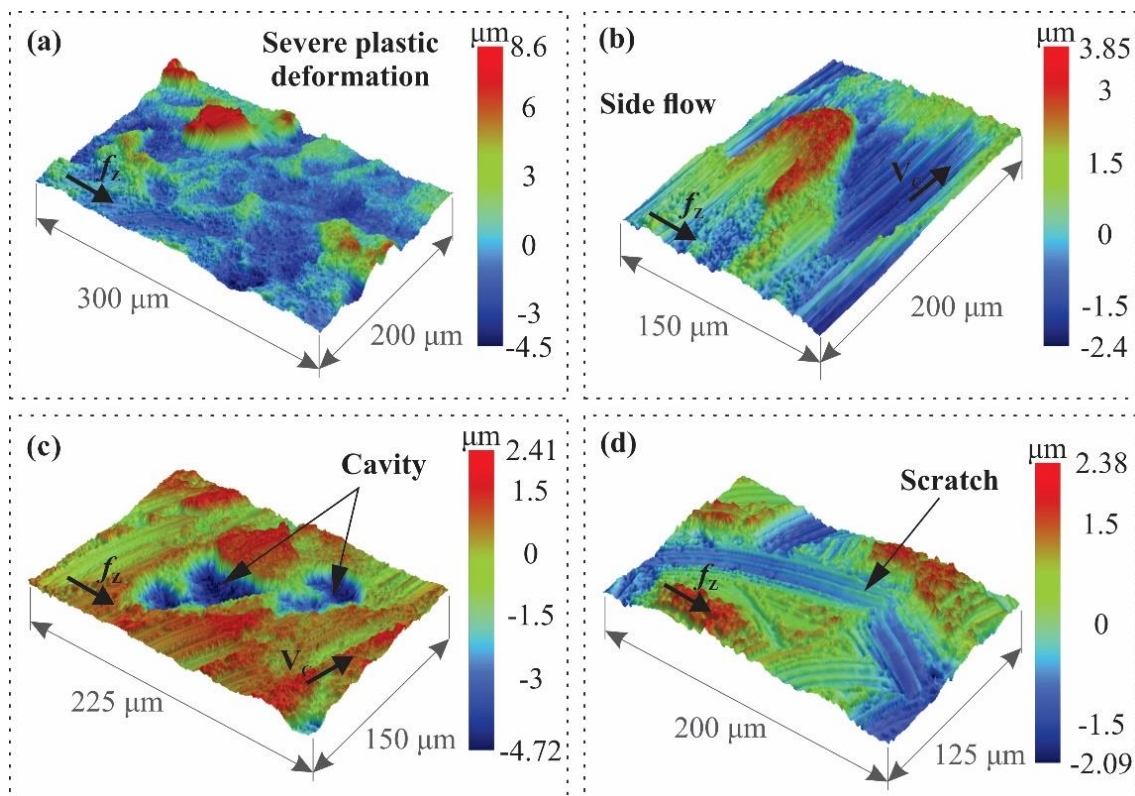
Damages identified on the machined surfaces: a) severe plastic deformation; b) side flow; c) cavity; d) scratch lead angle at down-milling (Basso et al., 2022).
